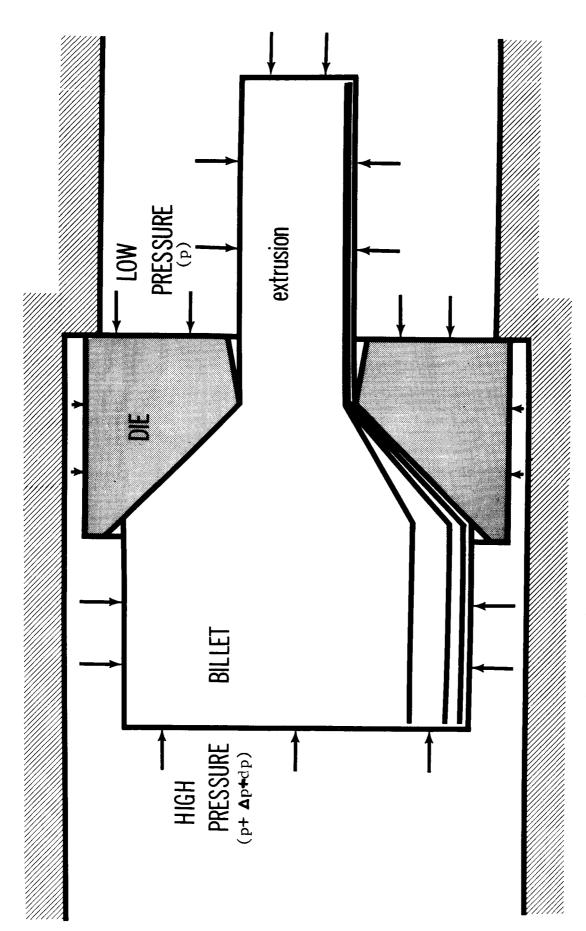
Schematic drawing of fluid-to-fluid extrusion process. Billet, die, and extrusion are completely within the pressure environment throughout the process.
